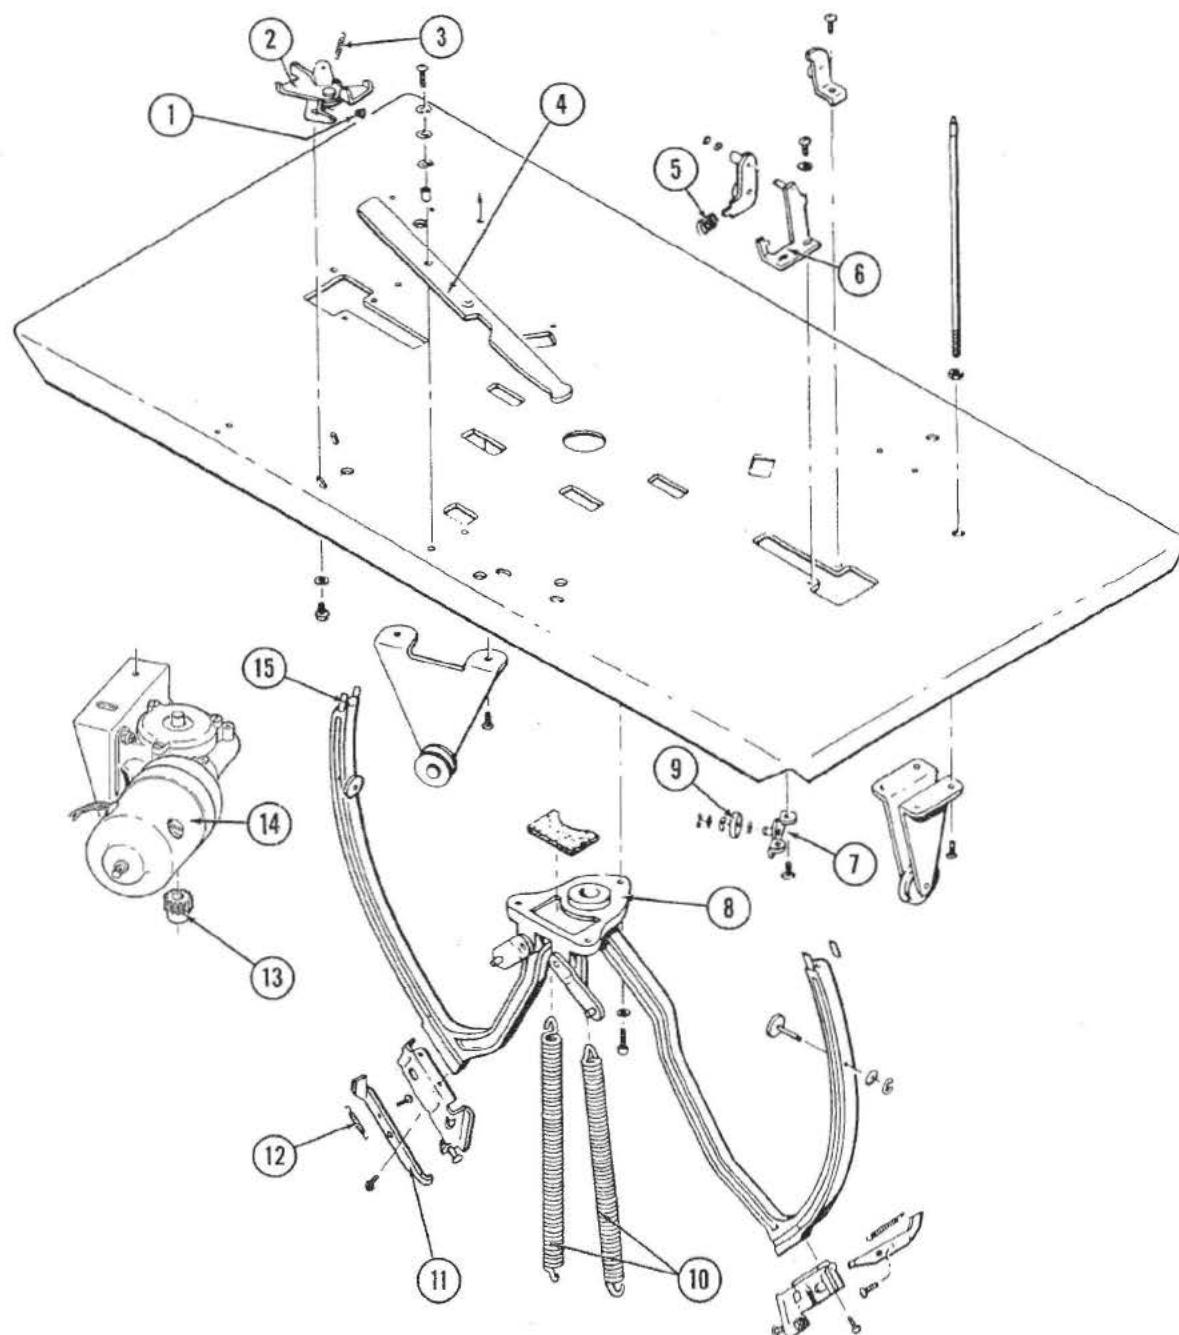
CHASSIS MOUNTING PLATE, PIVOT CASTING
